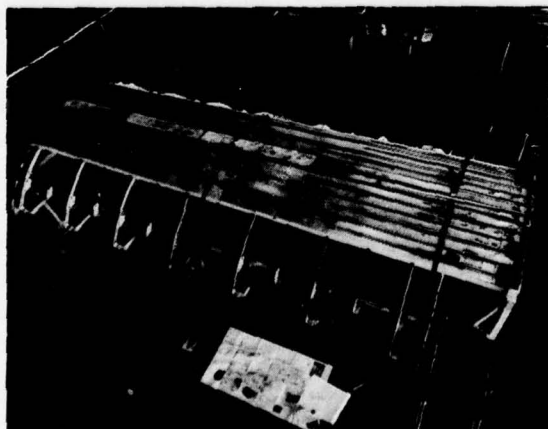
BONDED PANEL IN ASSEMBLY JIG
